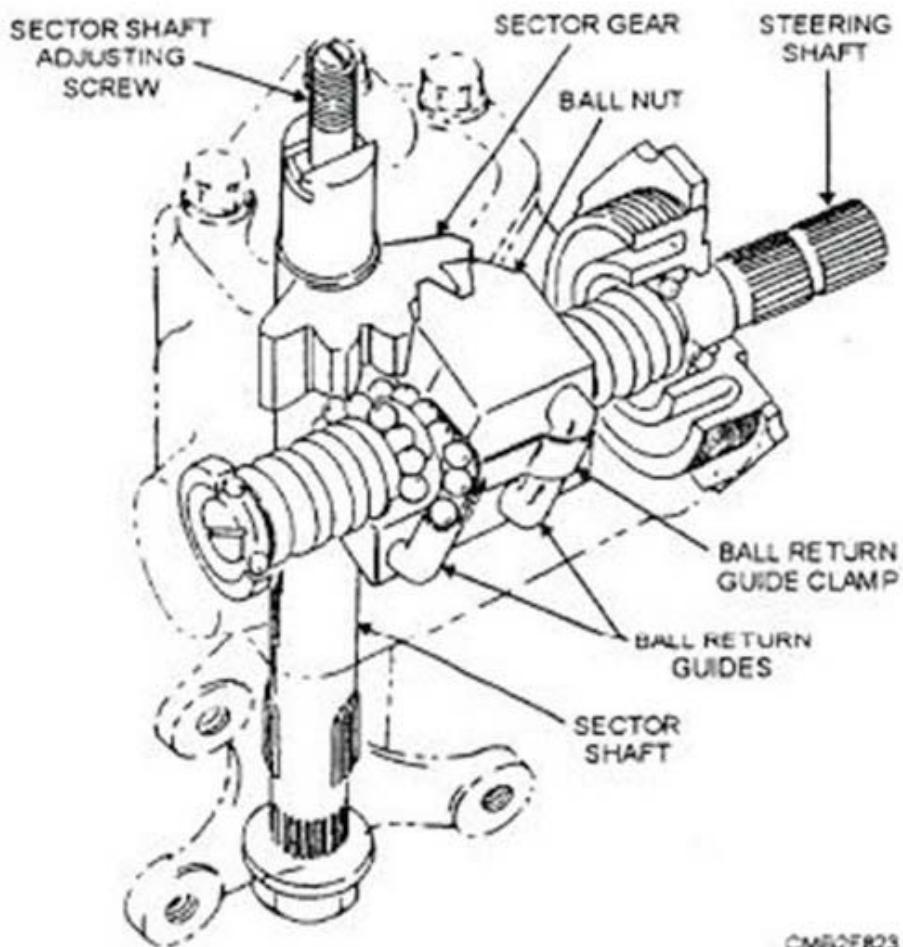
An example of a ball-bearing screw, in which contact between the nut and the thread is rolling contact via ball bearings rather than the sliding friction present in a normal nut. The bearings RECIRCULATE through return tubes as the nut travels along its thread, so axial movement is limited only by the length of the thread.
